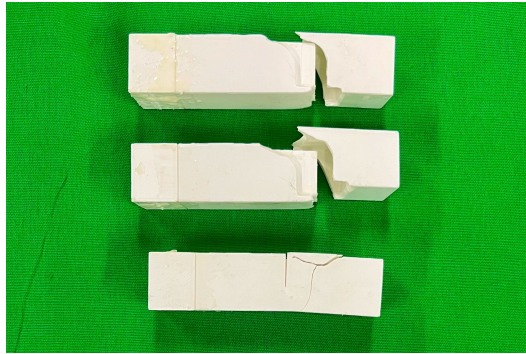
Test specimens after a three-point bending test using the proposed joining method
